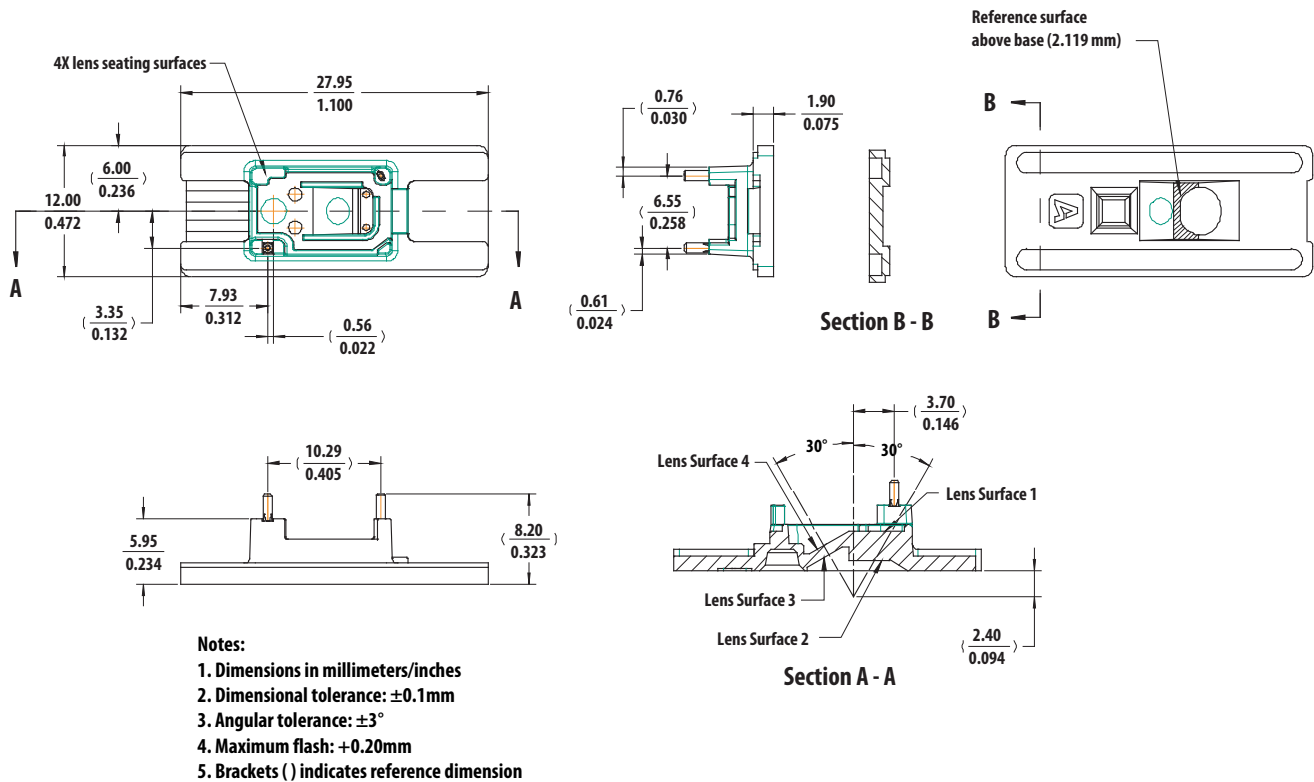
ADNS-6180-001 trim lens outline drawings and details
